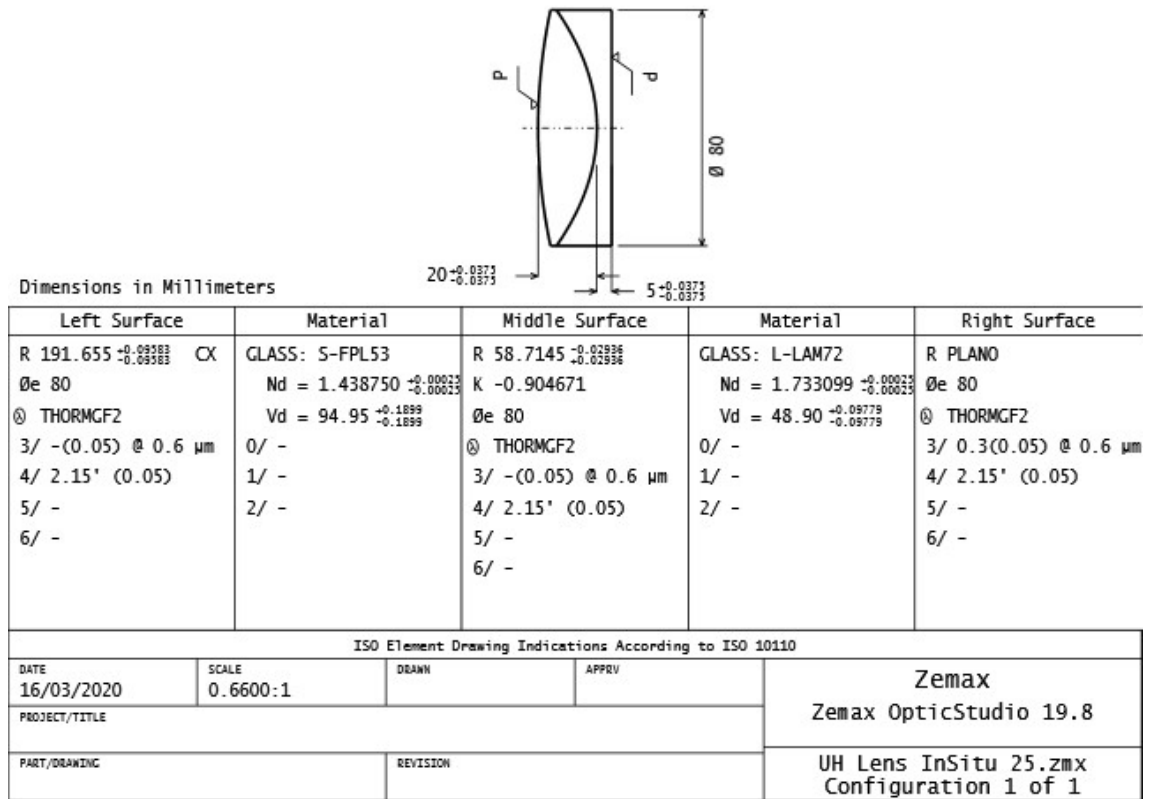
ISO 10110 Standard Element Drawing for the cemented doublet element of the triplet lens system. This table displays the element parameters and their tolerances.
